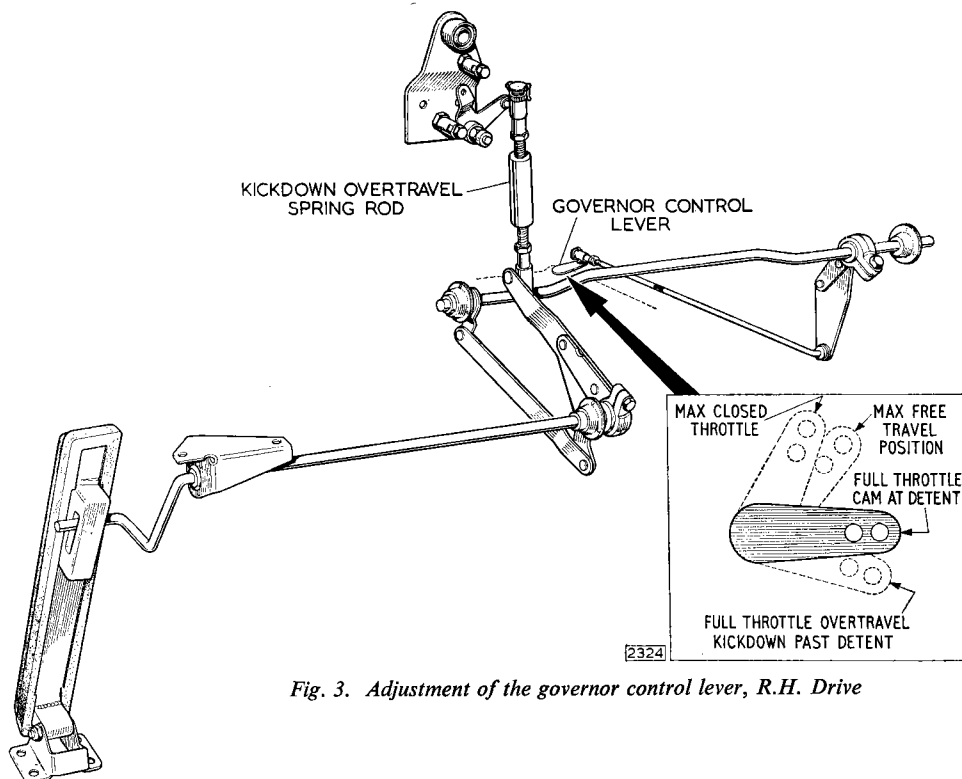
Adjustment of the governor control lever, R.H. Drive
